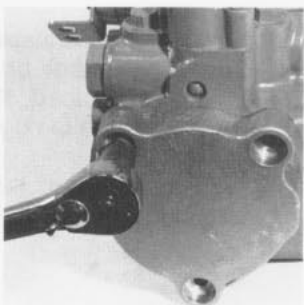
Install Charge Pump Cover or Pad Adapter
